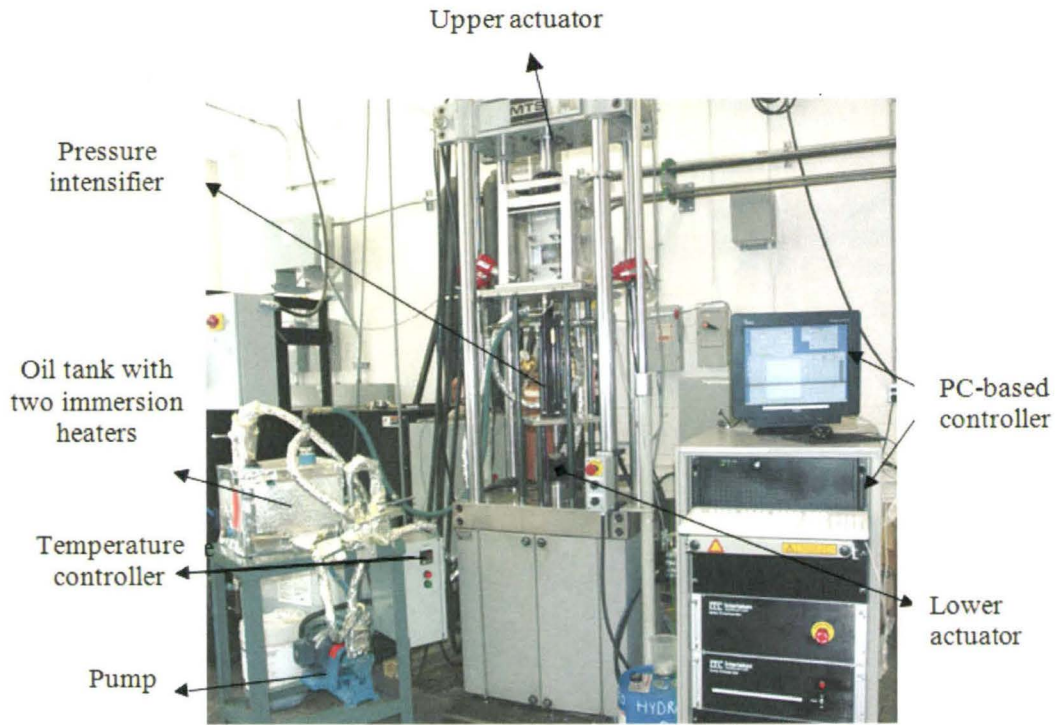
A photograph of oil based tube bulging system (AF-HOTF) built on MTS test frame.
